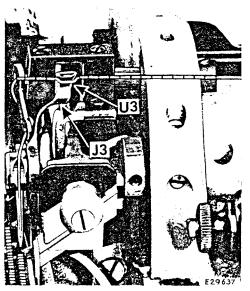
Needle Thread Controller 164151 in Correct Relation to Needle Thread
